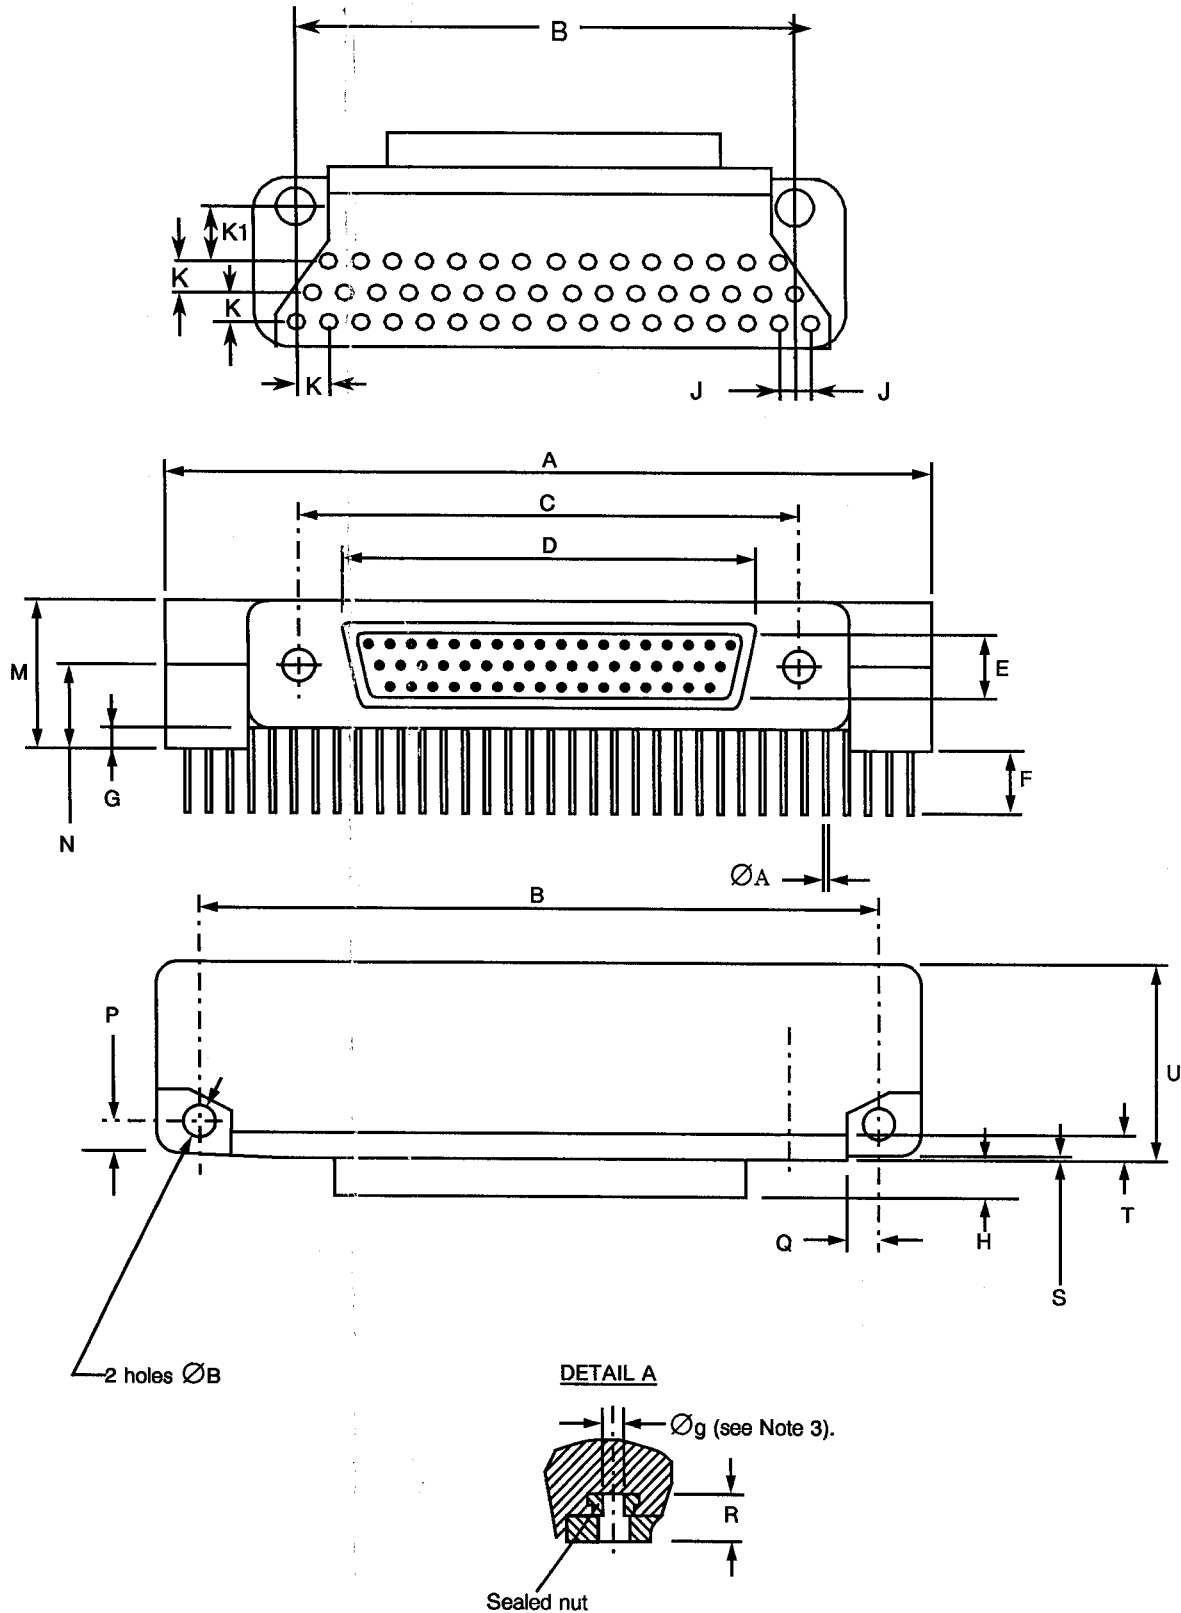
PHYSICAL DIMENSIONS (CONTINUED)
